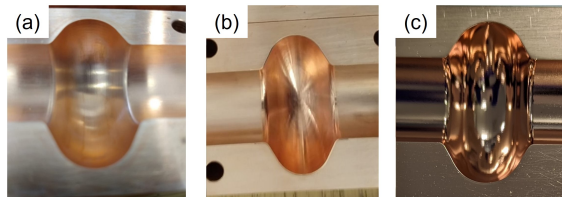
Cavities machined with (a) the initial machining tool, (b) the fast machining tool and (c) after EP.
